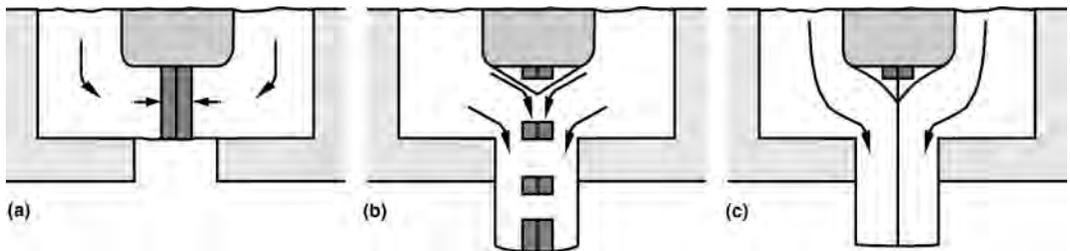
Breakup of the surface layer in longitudinal welds. (a) Meeting under the leg. (b) Breaking apart. (c) Clean longitudinal weld [Ake 92]
